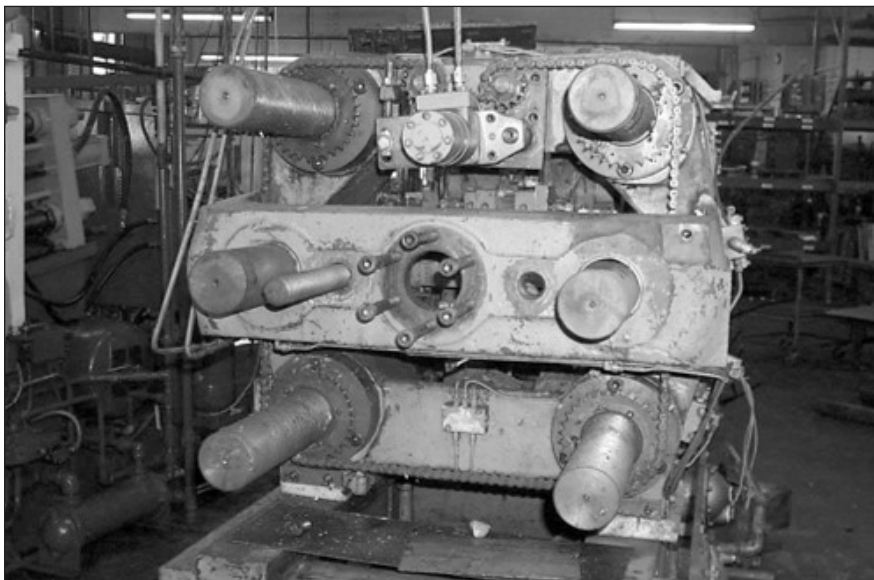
Gear-, worm-, and chain-driven shut heights
